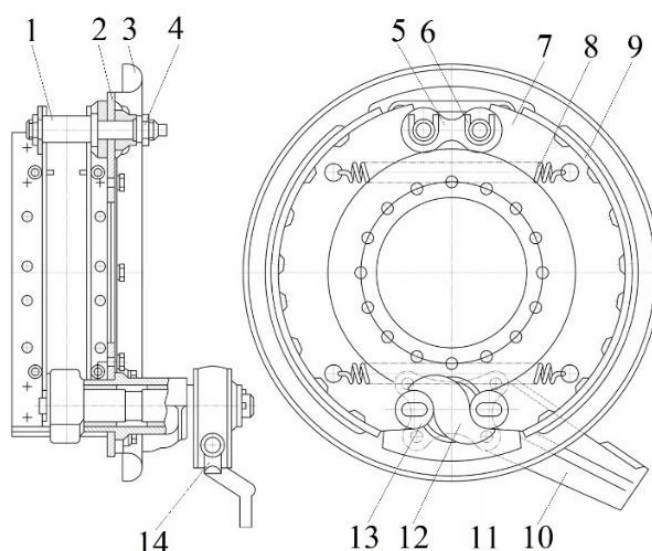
Brake mechanism of the car KamAZ 1-axis pad; 2- caliper; 3- flap; 4-nut axis; 5-lining of axes pads; 6- linchpin axis pad; 7-brake pad; 8-spring; 9-friction pad; 10-bracket of the expansion cam; 11- roller's axis; 12- expansion cam; 13-roller; 14-regulating roller
